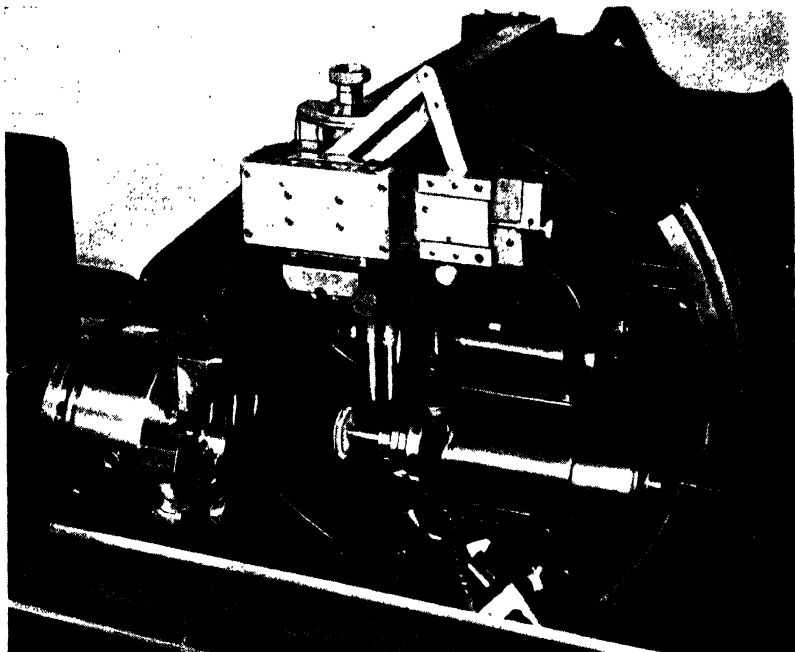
EX-CELL-O PANTOGRAPH-TYPE INTERNAL GRINDING-WHEEL DRESSER
